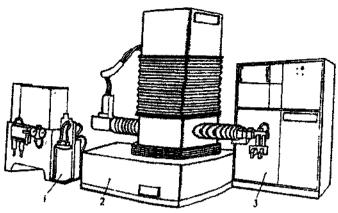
Hydraulically actuated robot: 1 – remote hydraulic power pack; 2 – manipulator; 3 – control cabinet
